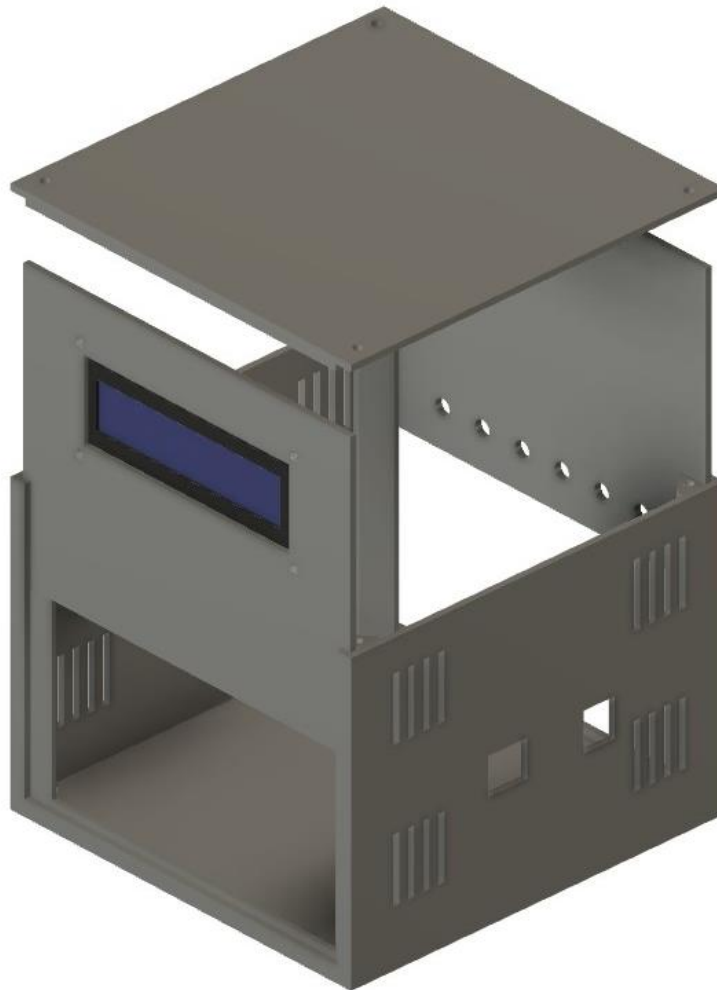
“Exploded” view of the 3D-designed housing for FSMCU.
